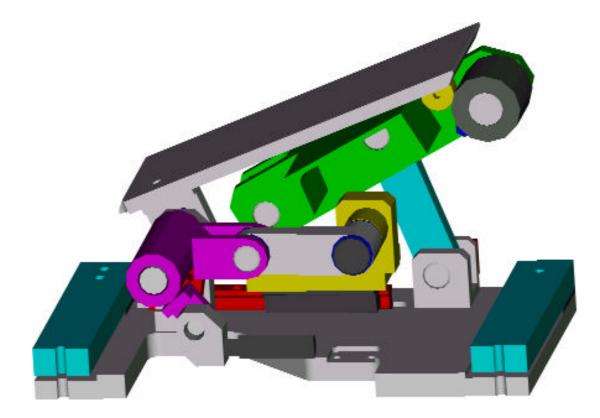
Wheel Stop (Up Position) – Section View Through the Centerline of the Air Cylinder
